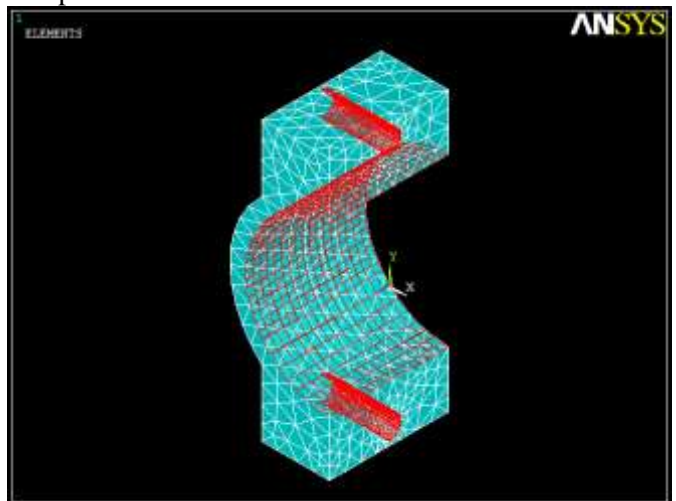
Load and boundary constrained on the Crank end Bearing Lower half.
